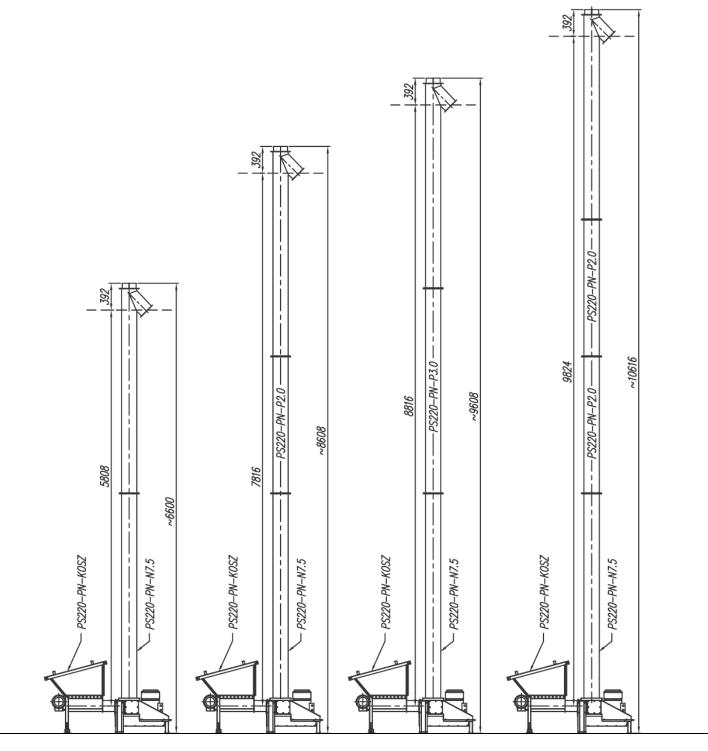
Extensions of the vertical screw conveyor - basic dimensions.
